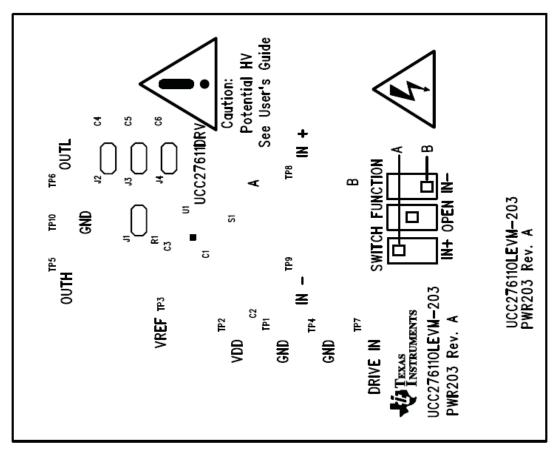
UCC276110LEVM-203 Top Layer Assembly Drawing (top view)
